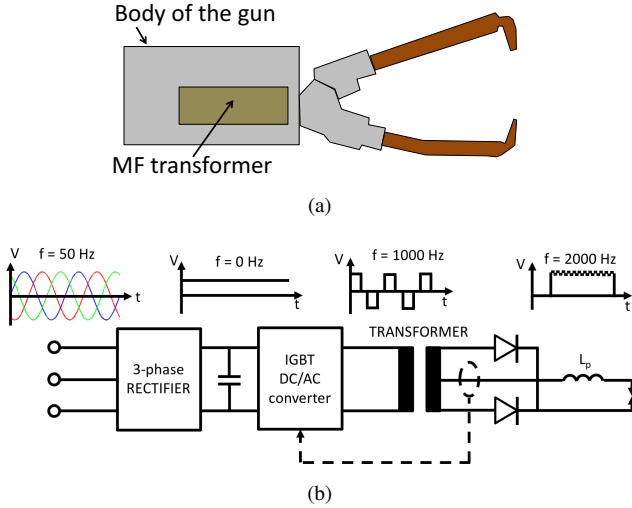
Layout of an MFDC welding gun (a) and scheme of the supply chain of the MFDC welding system (b). The welding gun is supplied from the standard 3-phase-50 Hz distribution. The AC signal is then rectified and filtered obtaining a DC signal at the DC/AC converter input. The DC/AC converter provides a square wave AC signal at 1000 Hz used to supply the on board transformer. At the transformer output, the AC signal is rectified by means of a full-wave diode rectifier that provides the welding DC signal. The absence of filters leaves a superposed ripple at two times the frequency of the rectified signal (2000 Hz).
